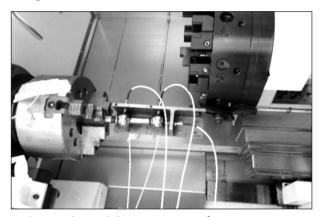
Thermal distortion set-up for measurement setup on turning machine.
